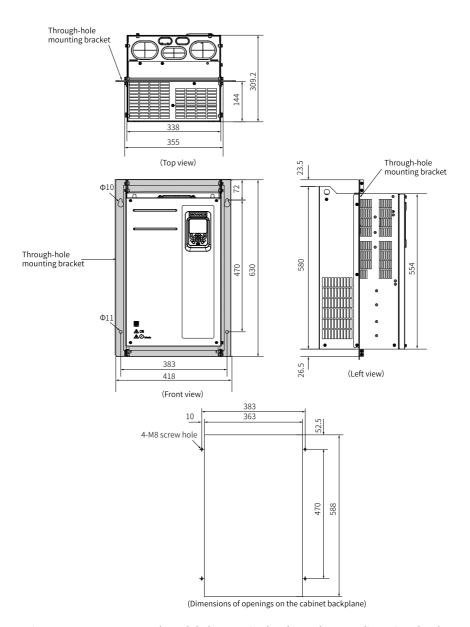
MD500-AZJ-A1T8 through-hole mounting bracket and cut-out dimensions (mm)
